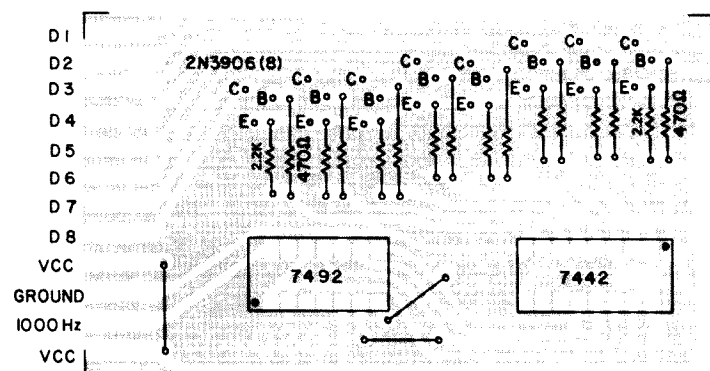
(b). DSU component layout. 1 board per counter. Dot indicates pin 1.
